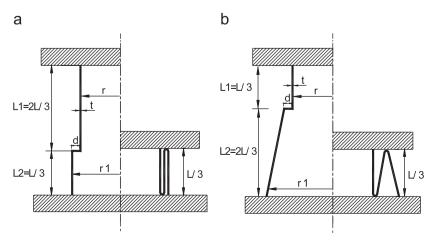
Scheme of the new type of invertubes: (a) SR tube and (b) TR tube.
